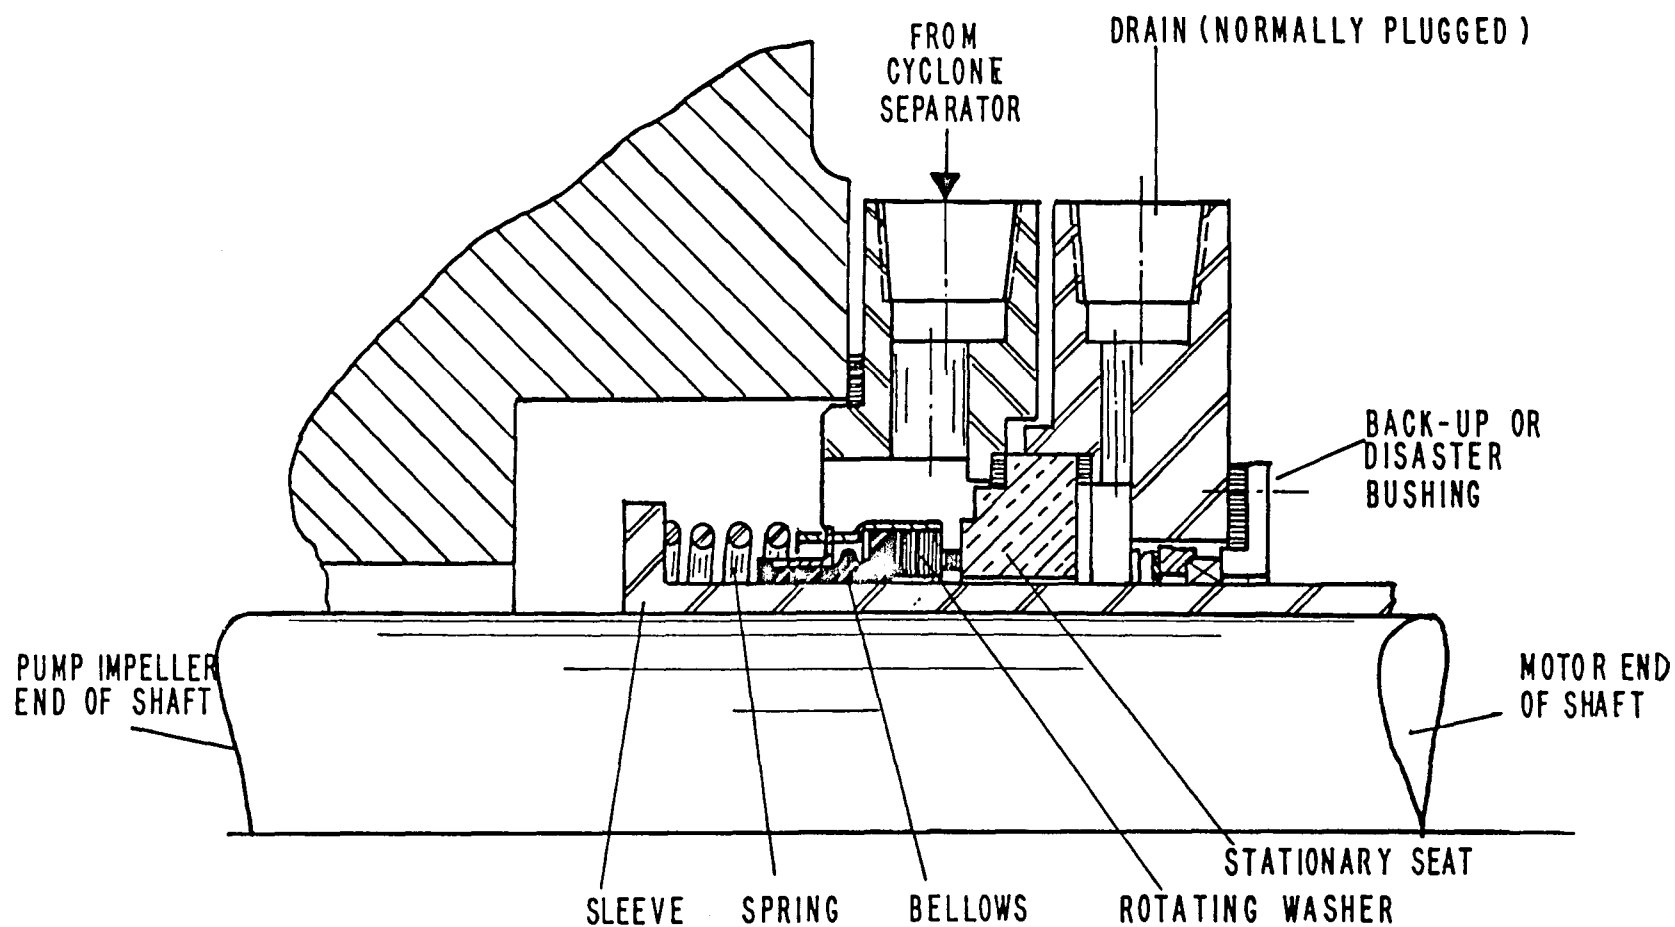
CROSS SECTION OF MECHANICAL SHAFT SEAL
